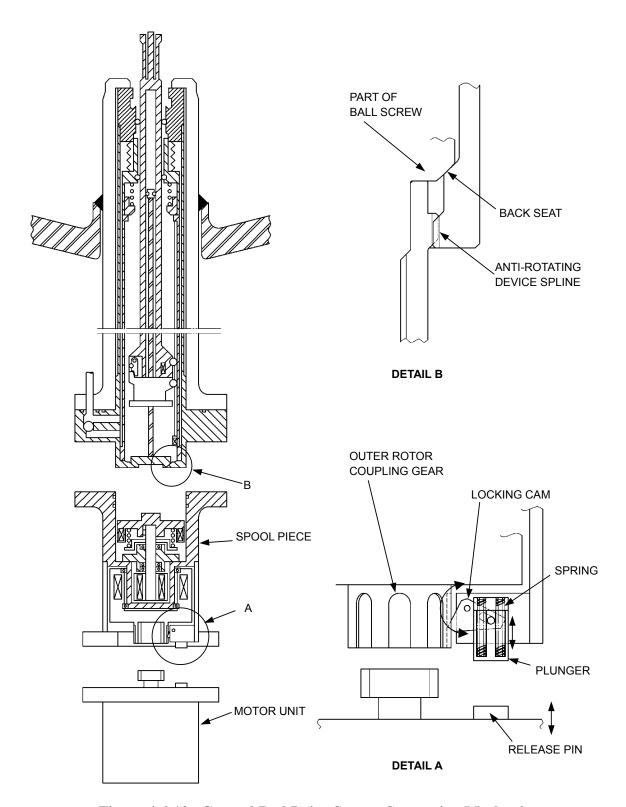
Control Rod Drive System Separation Mechanism
